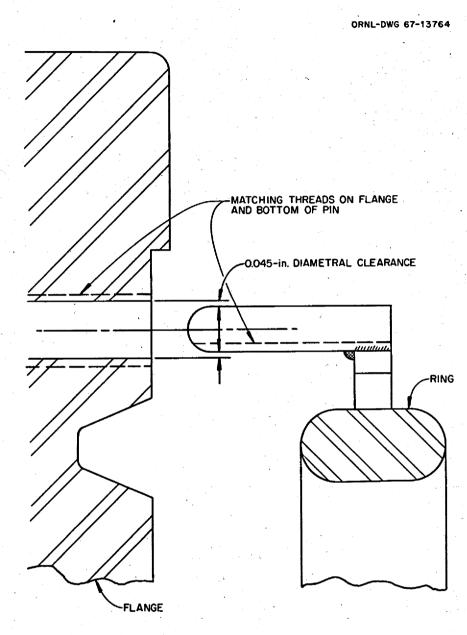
Detail of Arrangement for Locking Ring to Flange During Maintenance.
